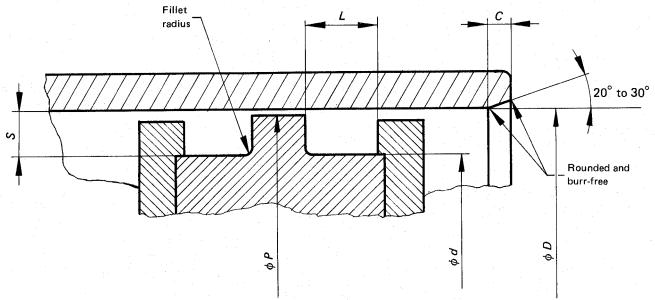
Example of housing for piston seal iTeh STANDARD PREVIEW (standards.iteh.ai)
